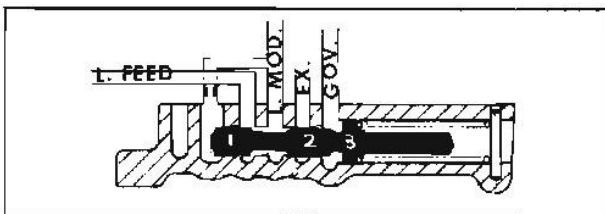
B-18 Modulator Limit Valve - Wide Open Throttle
